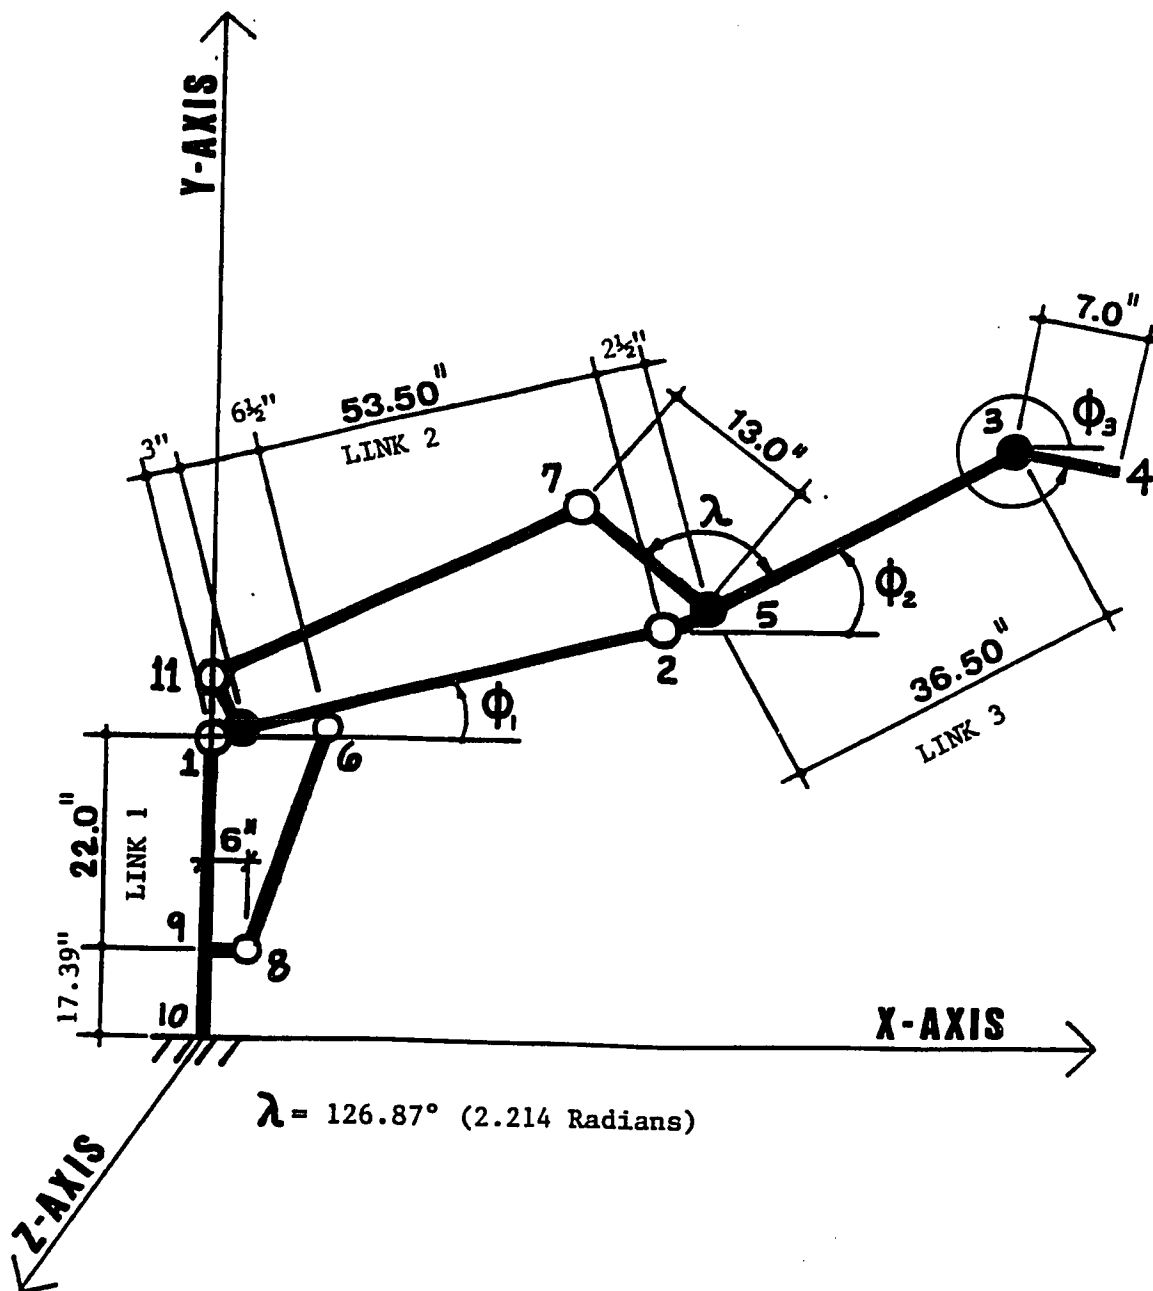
DIMENSIONAL SCHEMATIC OF ROBOT MANIPULATOR
